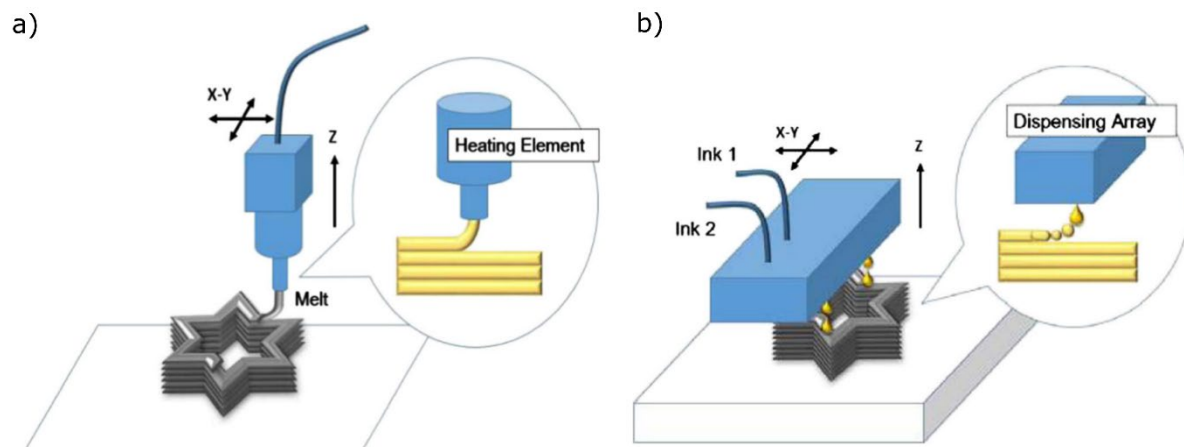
Extrusion and deposition 3D printing technologies (J. Sun, Zhou, et al., 2015): a) FDM 3D printing; b) Ink-Jet 3D printing.
